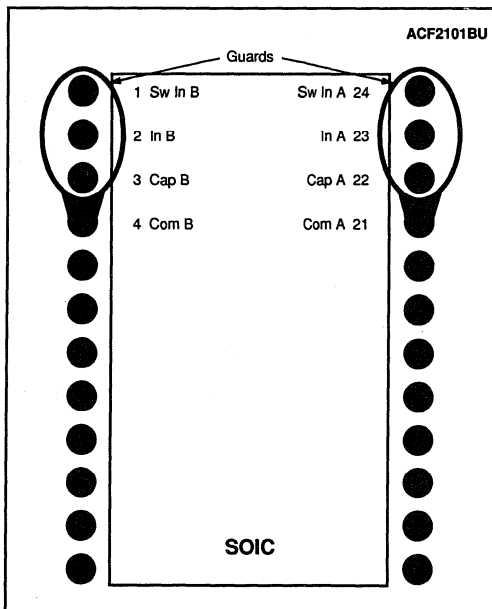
PC Board Layout Showing "Guard" Traces for Input, SOIC package. Both top and bottom of board should be guarded.
